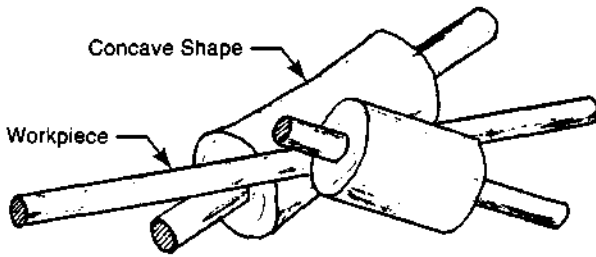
K4 Rotary straightening of bar material. The workpiece moves axially. Alternating compressive and tensile stresses straighten the workpiece. (Guides for the workpiece are not shown.)
